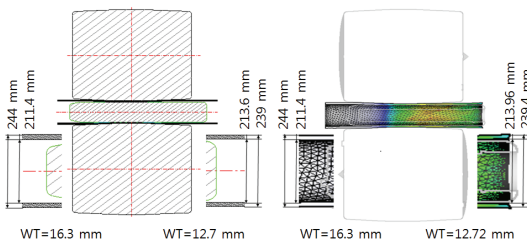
Schematic drawing of deformed dimension after elongation rolling process
